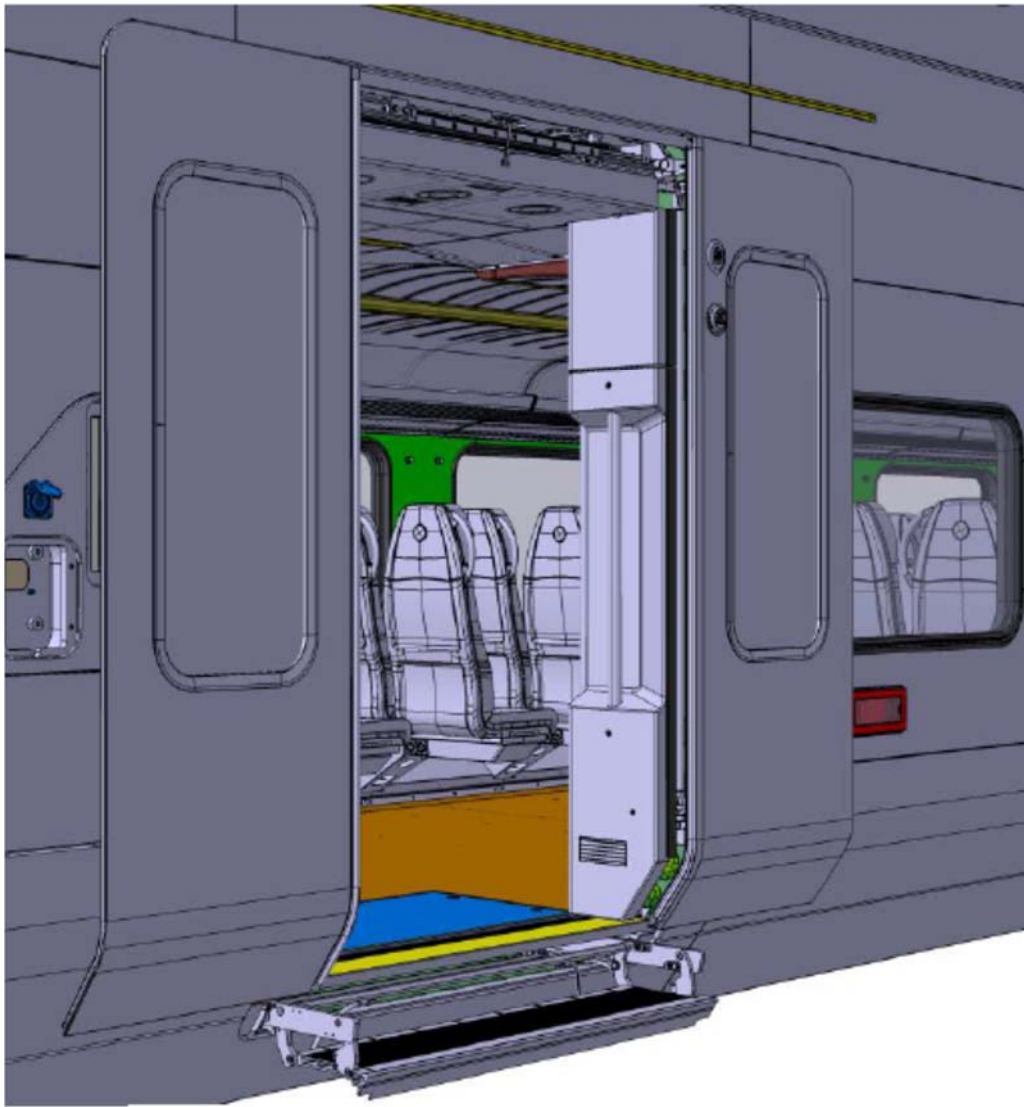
CAD Rendering of Side Door Step and Side Door Handholds
